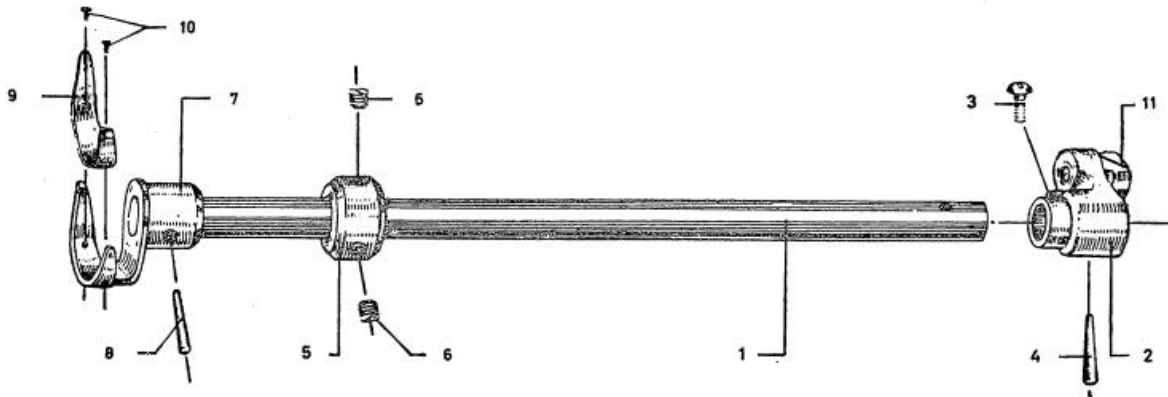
SHUTTLE DRIVER ASSEMBLY
